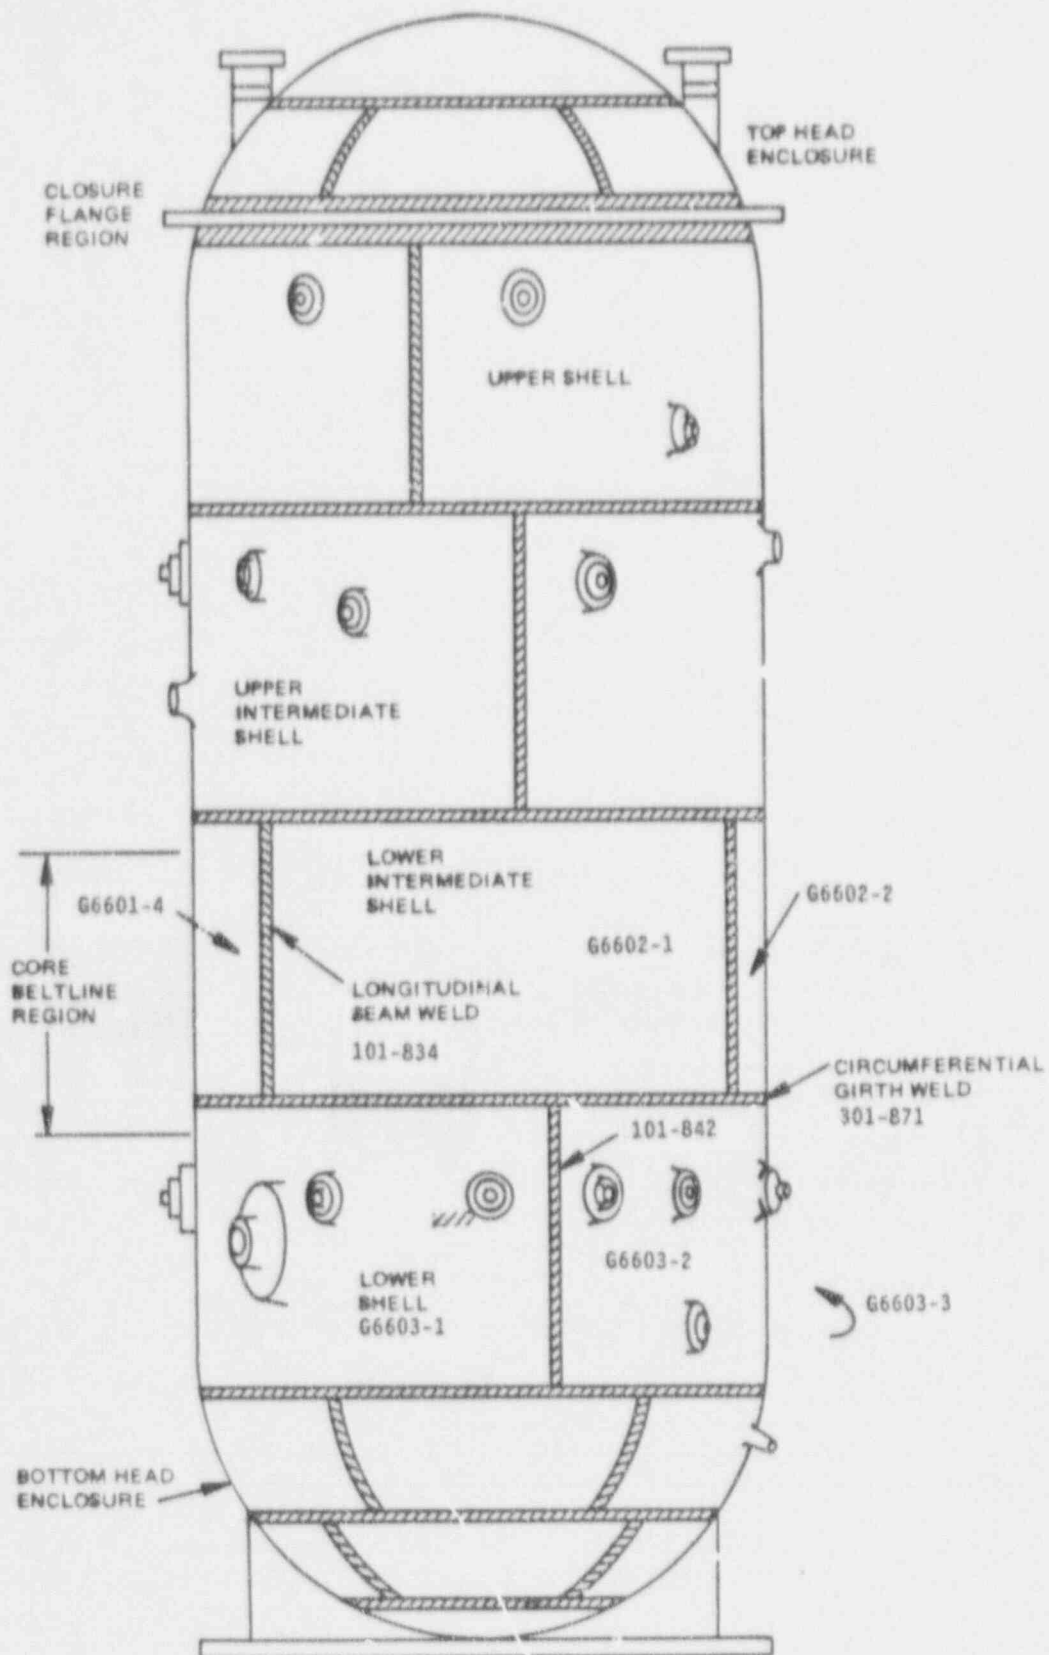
Schematic of the RPV Showing Arrangement of Vessel Plates and Welds
